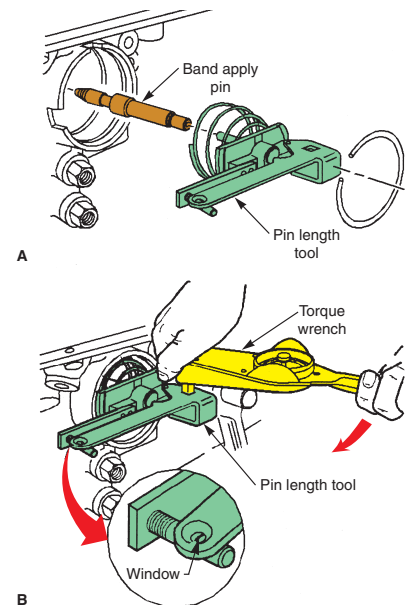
A special tool must be used to adjust the band on many modern transmissions and transaxles. A—The tool is installed with the existing band apply pin. B—The band is applied with the torque wrench. If the pin is the correct length, a white line will appear in the tool's window. (General Motors)
